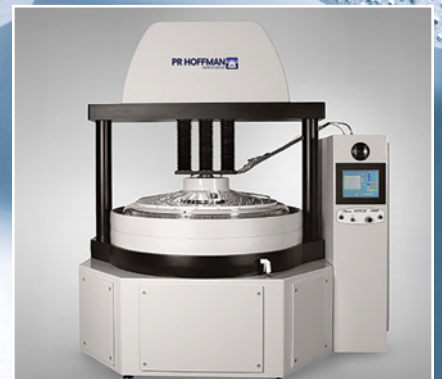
PR Hoffman 5400 double-sided polishing machine.
